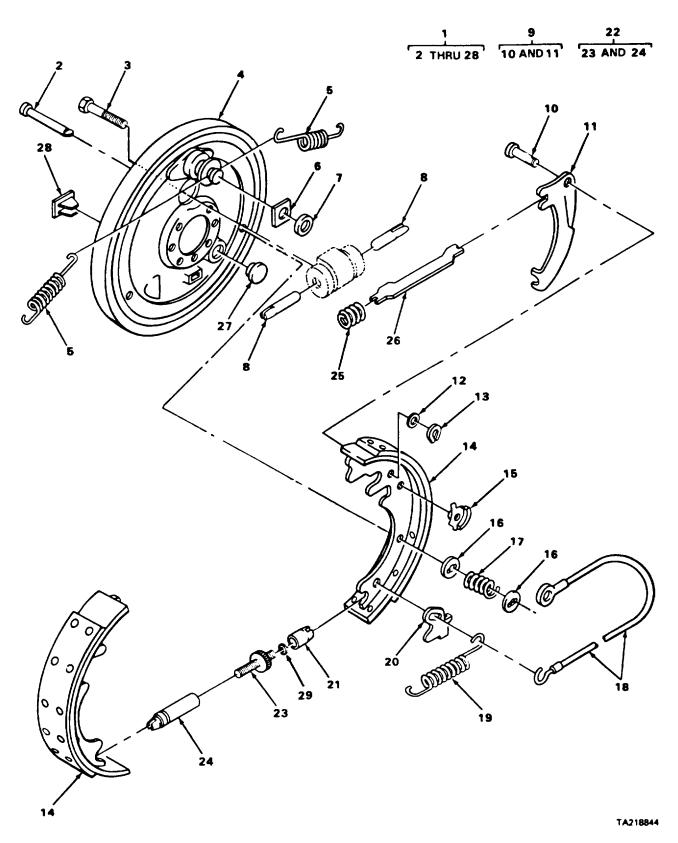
SERVICE BRAKE ASSEMBLY.
